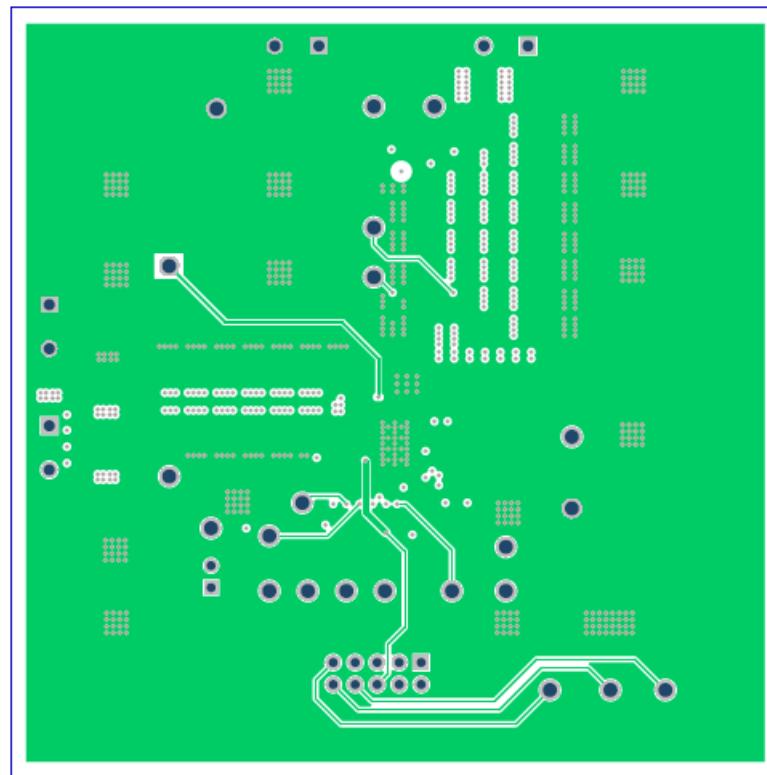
PWR-847EVM Inner Layer 3 (Top View)
